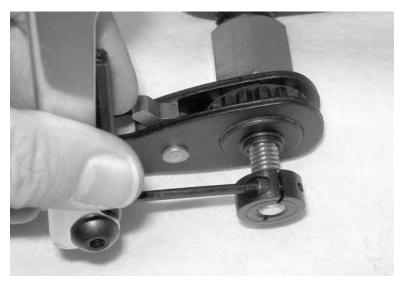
Replace the drawbar retaining collar and tighten the set screw to secure it.
